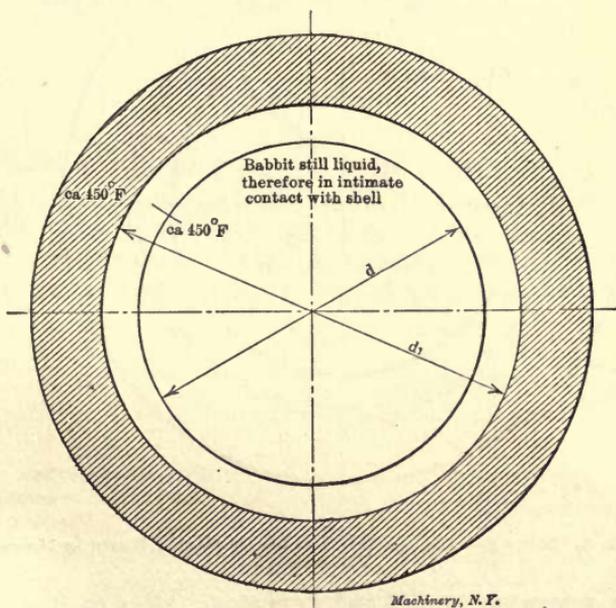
One-piece Bearing Babbitt just Poured. Both Shell and Babbitt at the Solidifying Temperature
